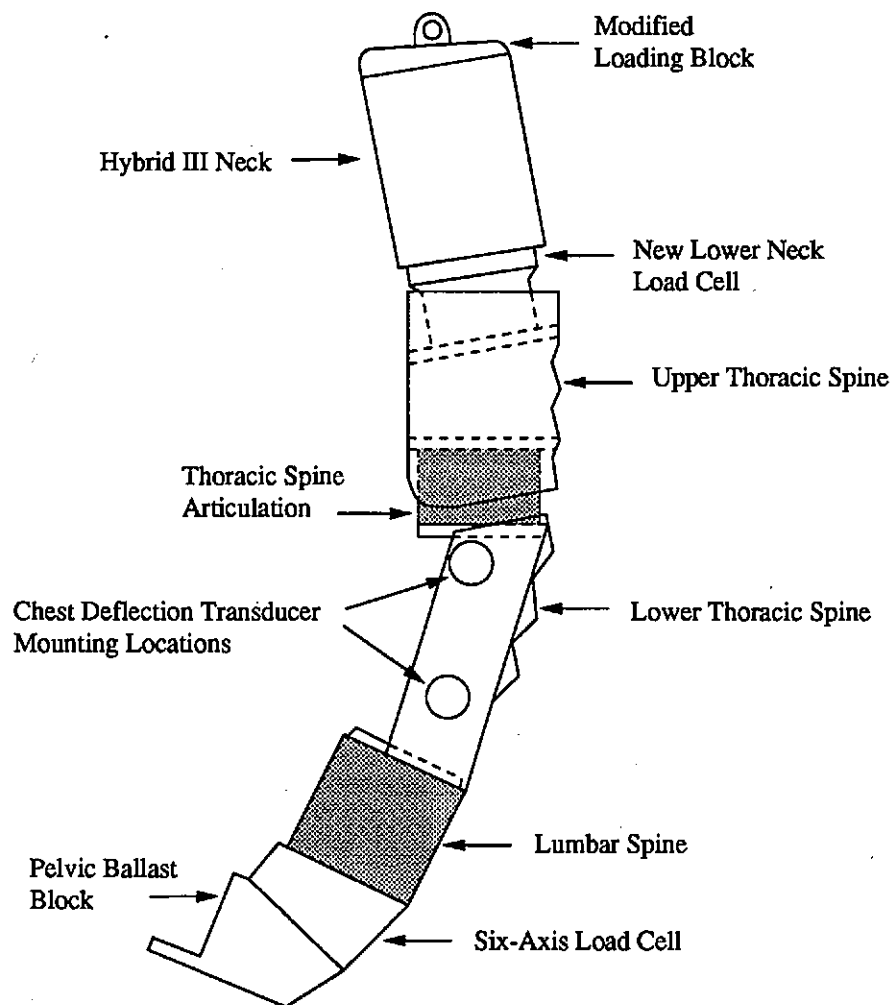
Side-view drawing of spine for Second Prototype-50M.
